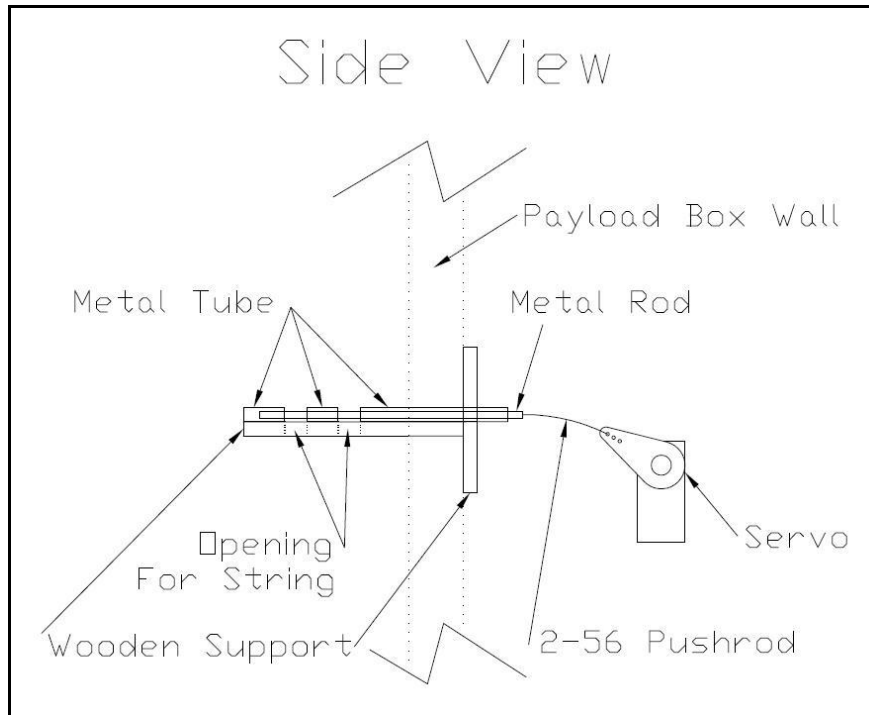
Side View Detail Drawing of Release Mechanism Design
